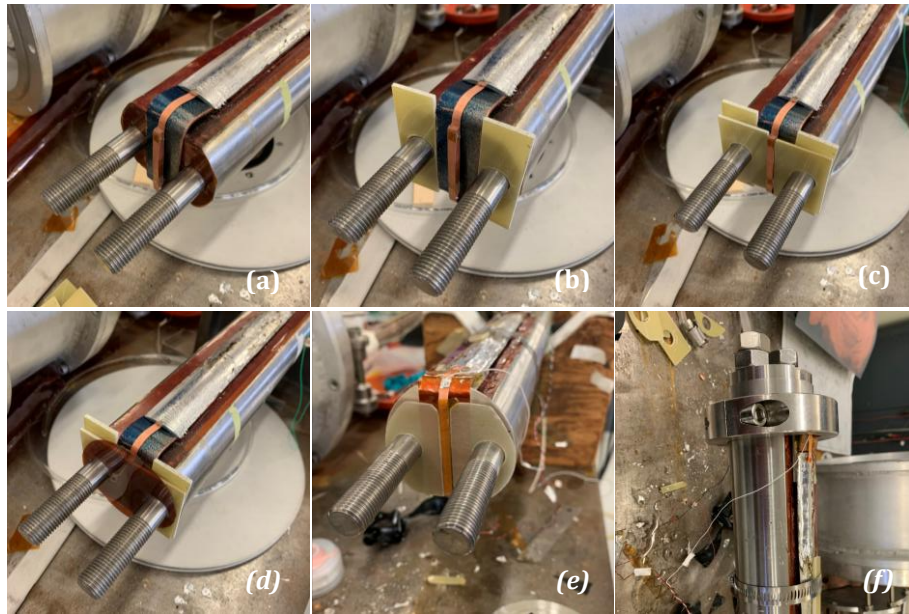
Steps for the TPI assembly. (a) Stack placed on the copper bent support; (b) G-10 added for bent support; (c) G-10 added for the stack; (d) Kapton laminate addition; (e) G-10 shaped; (f) bottom part secured with bolts and two-piece shaft collars.
